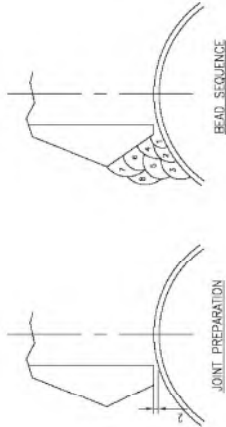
Alignment and welding practices for branch nozzle with O-let fitting
